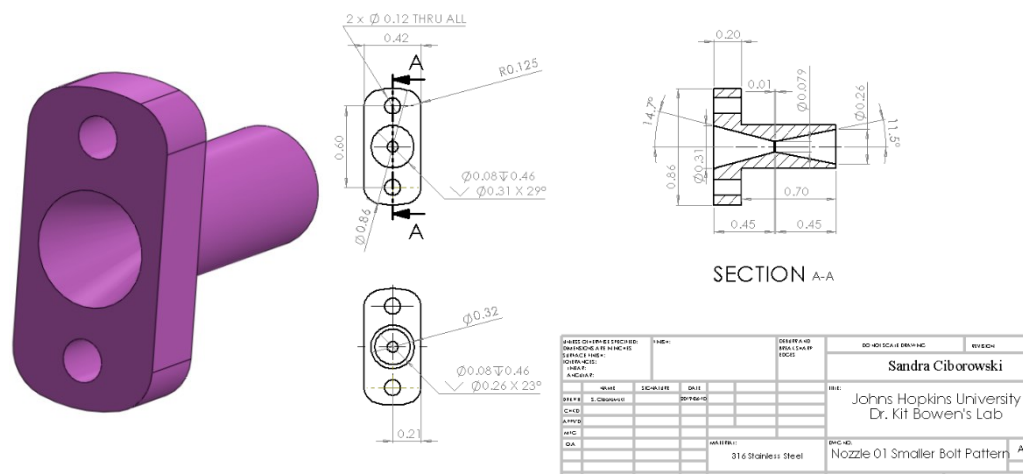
Conical Nozzle for 2-Pulse Valve Housing.
